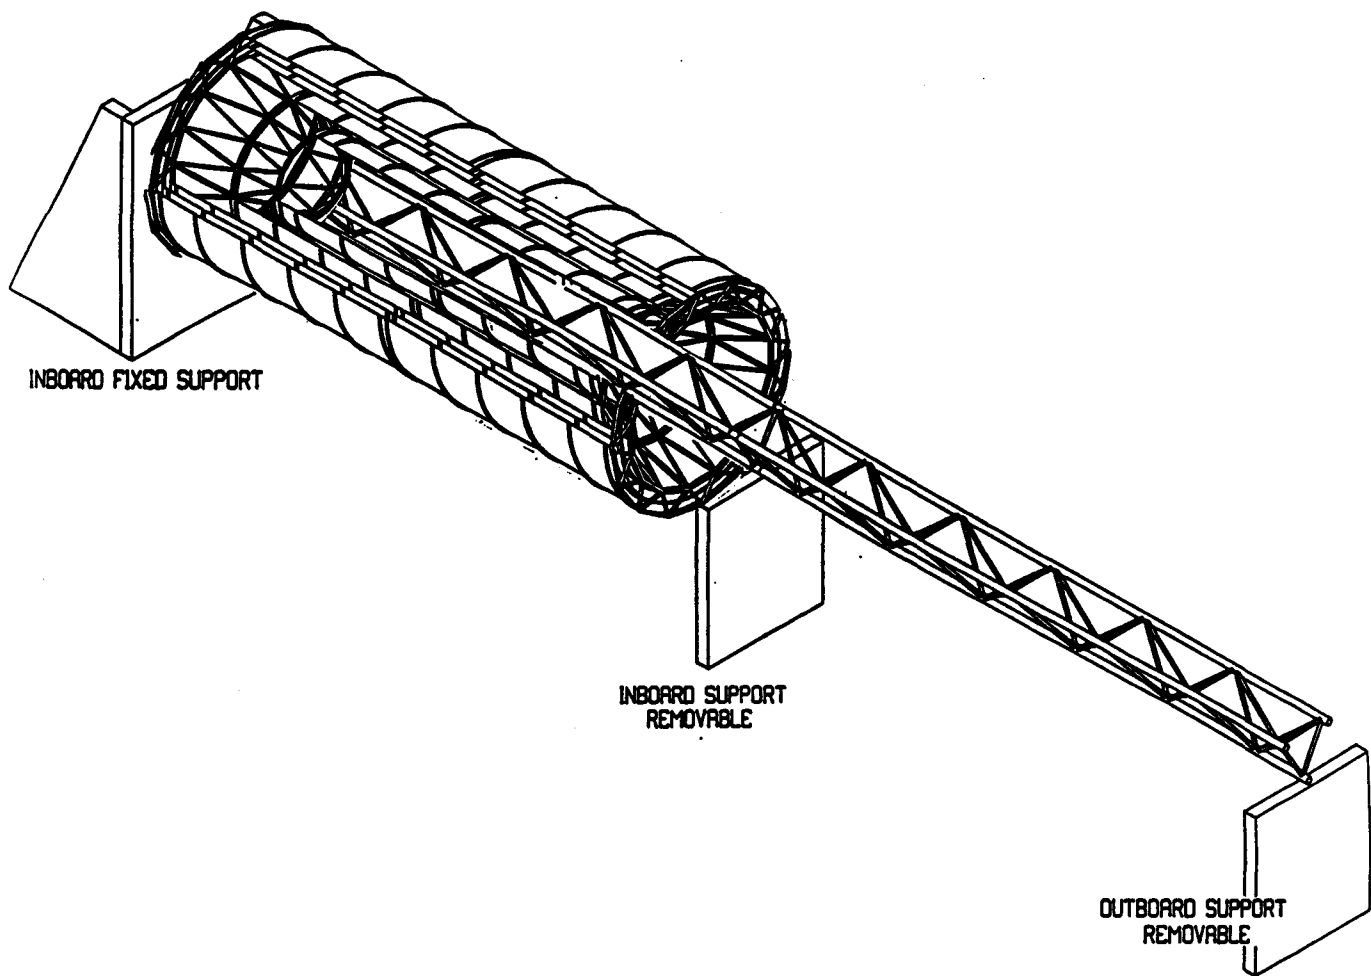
Completed tracking cylinders on assembly fixture.
